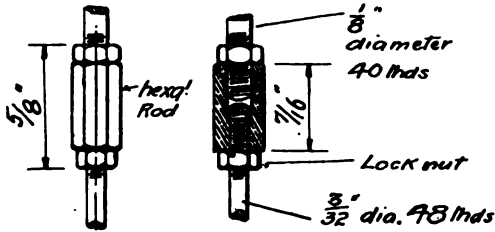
ALTERNATIVE SOCKET JOINT FOR GOVERNOR AND THROTTLE VALVE SPINDLE.
